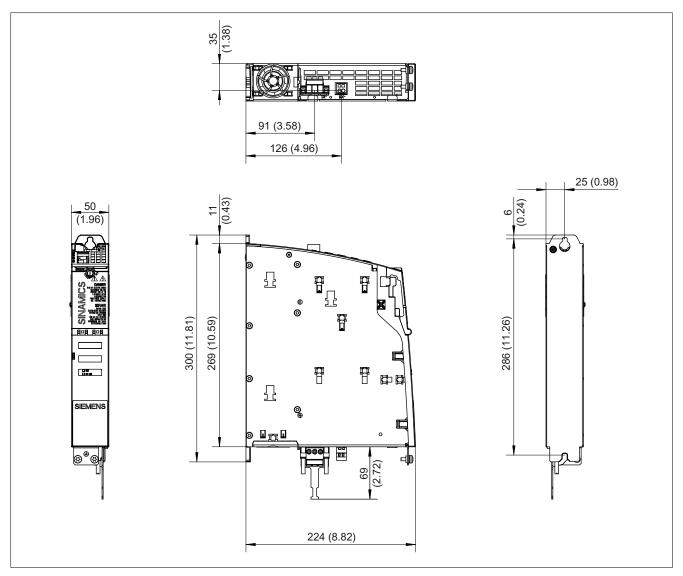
Dimension drawing of 3 A, 5 A, and 9 A Motor Modules Booksize Compact, all dimensions in mm and (inches); example: 5 A Single Motor Module
